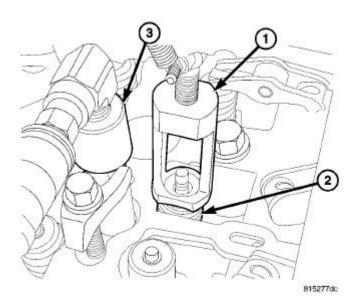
Adaptors & Valve Spring Courtesy of CHRYSLER LLC
